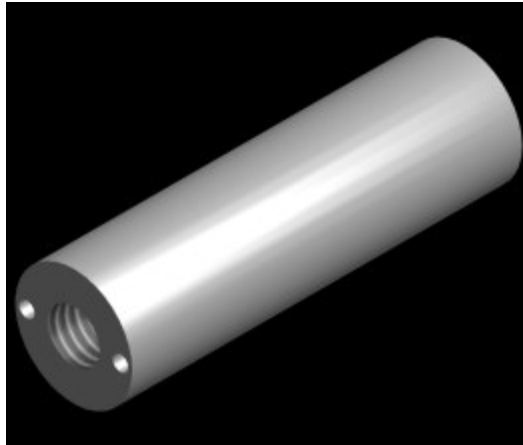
Chassis central rod. The component connects chassis and fly holder.
